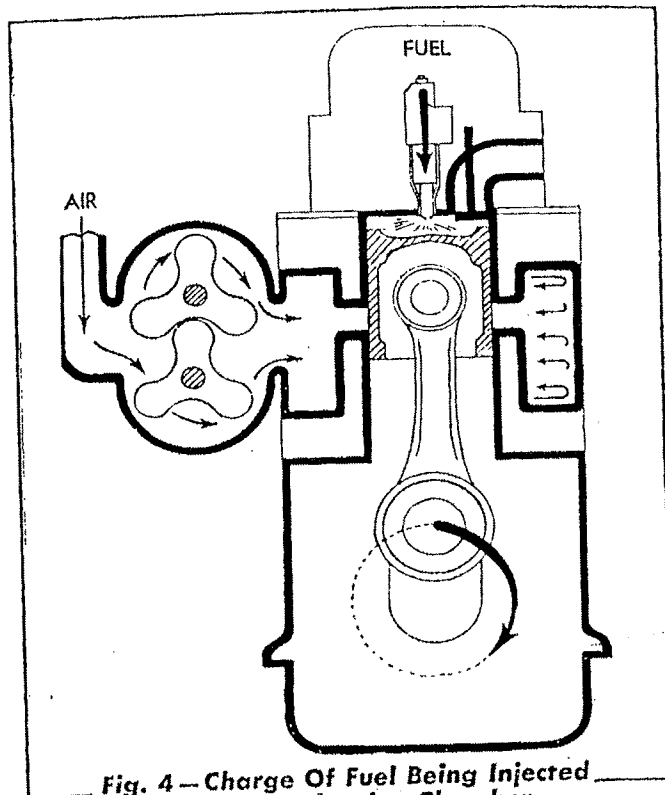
Charge Of Fuel Being Injected Into The Combustion Chamber
